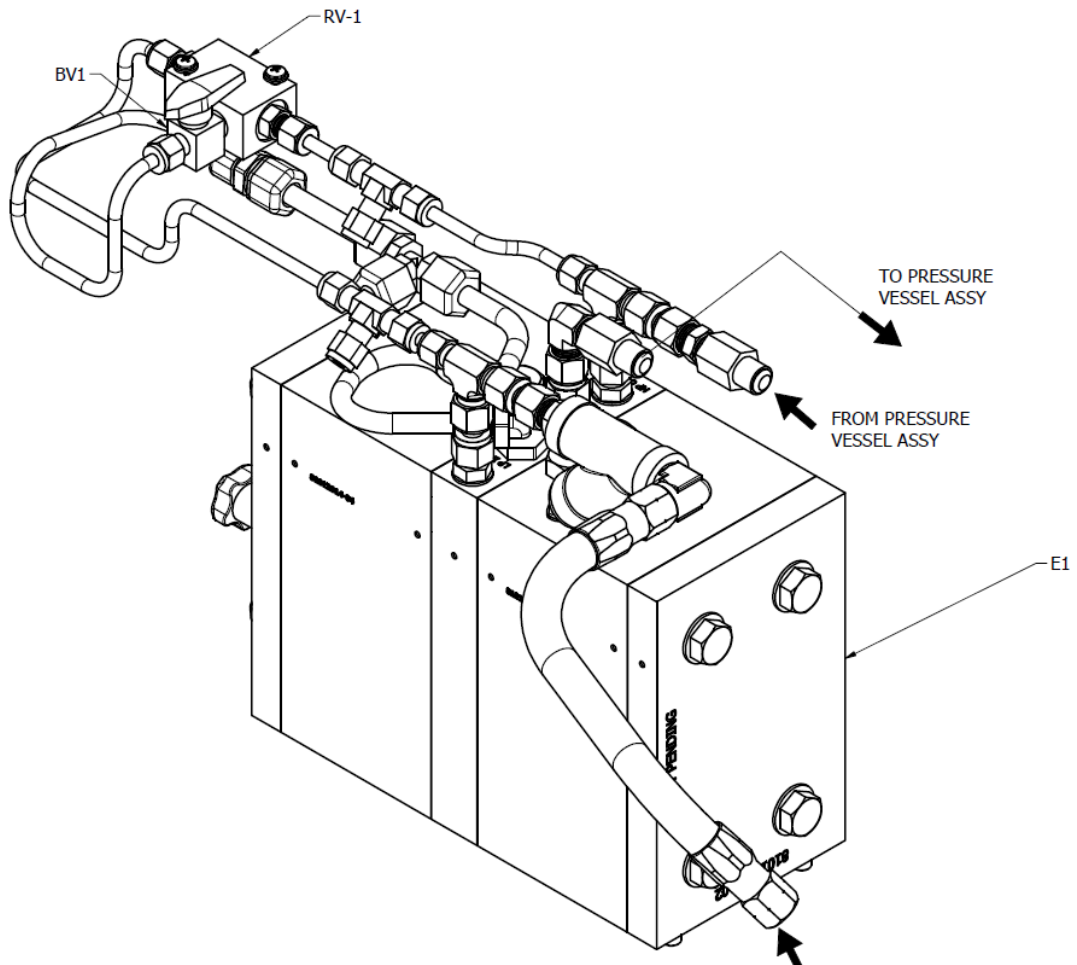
Component Callout of E.T.D/R.O Boost Assembly
